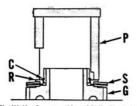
Concave sides of Belleville aprings (S) must face each other. Use Yanmar special tool 177095-99770 to compress springs (S) and retainer (R) so snap ring (C) can be installed in groove of gear.
